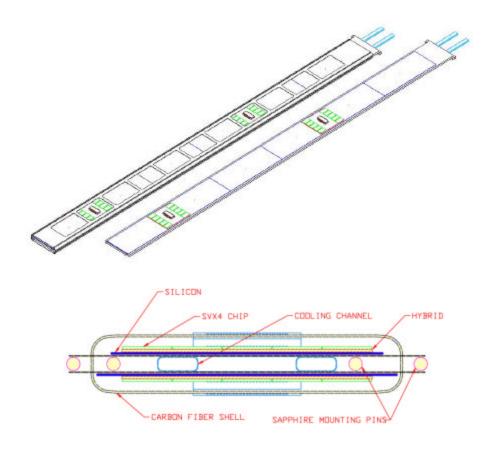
Stave assembly drawings. The upper drawing shows isometric views of the stave before and after installation of the outer shells. The lower plot is an end view of a complete stave assembly.
